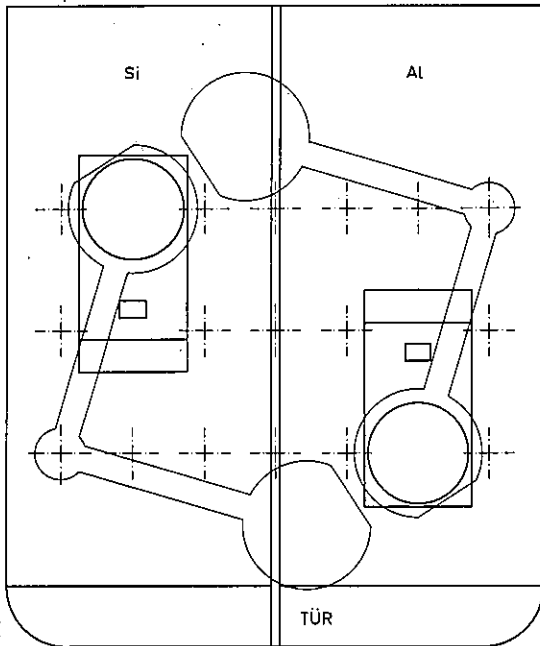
Typical example for proper installation of 2 ESQ 110 with shutter in coating plant BAK 550.
